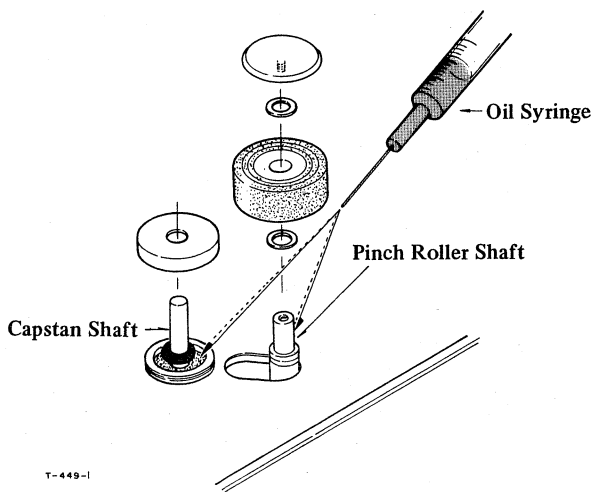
Capstan Shaft and Pinch Roller Shaft Oiling Points
